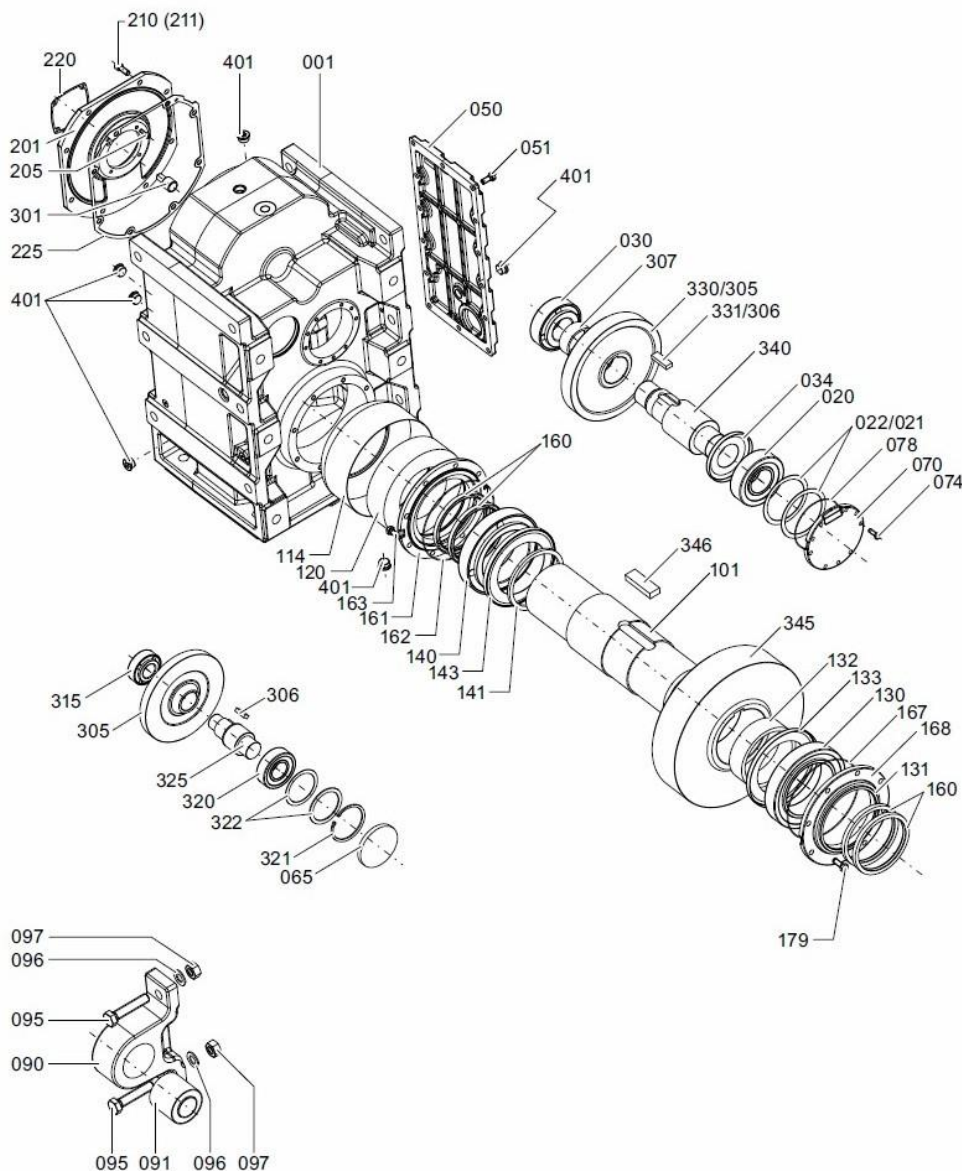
Exploded Parts Drawing of a Reduction Gearbox
